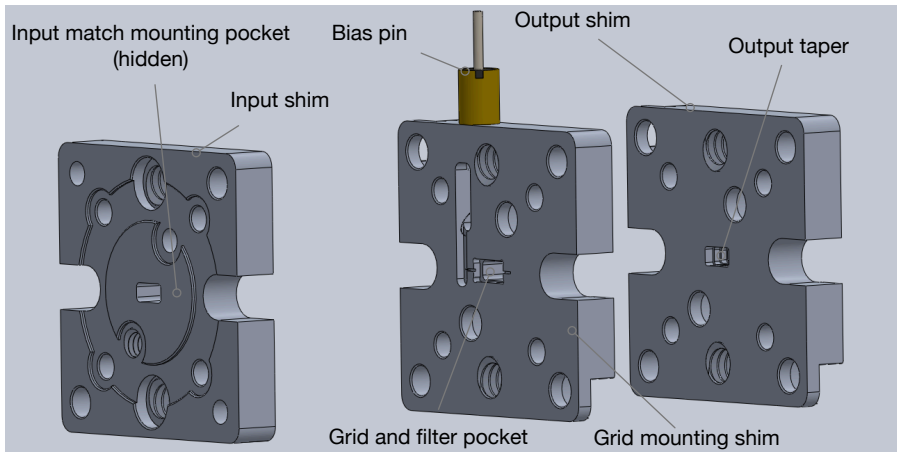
Exploded view of the shim system used for the X2 frequency multiplier.
